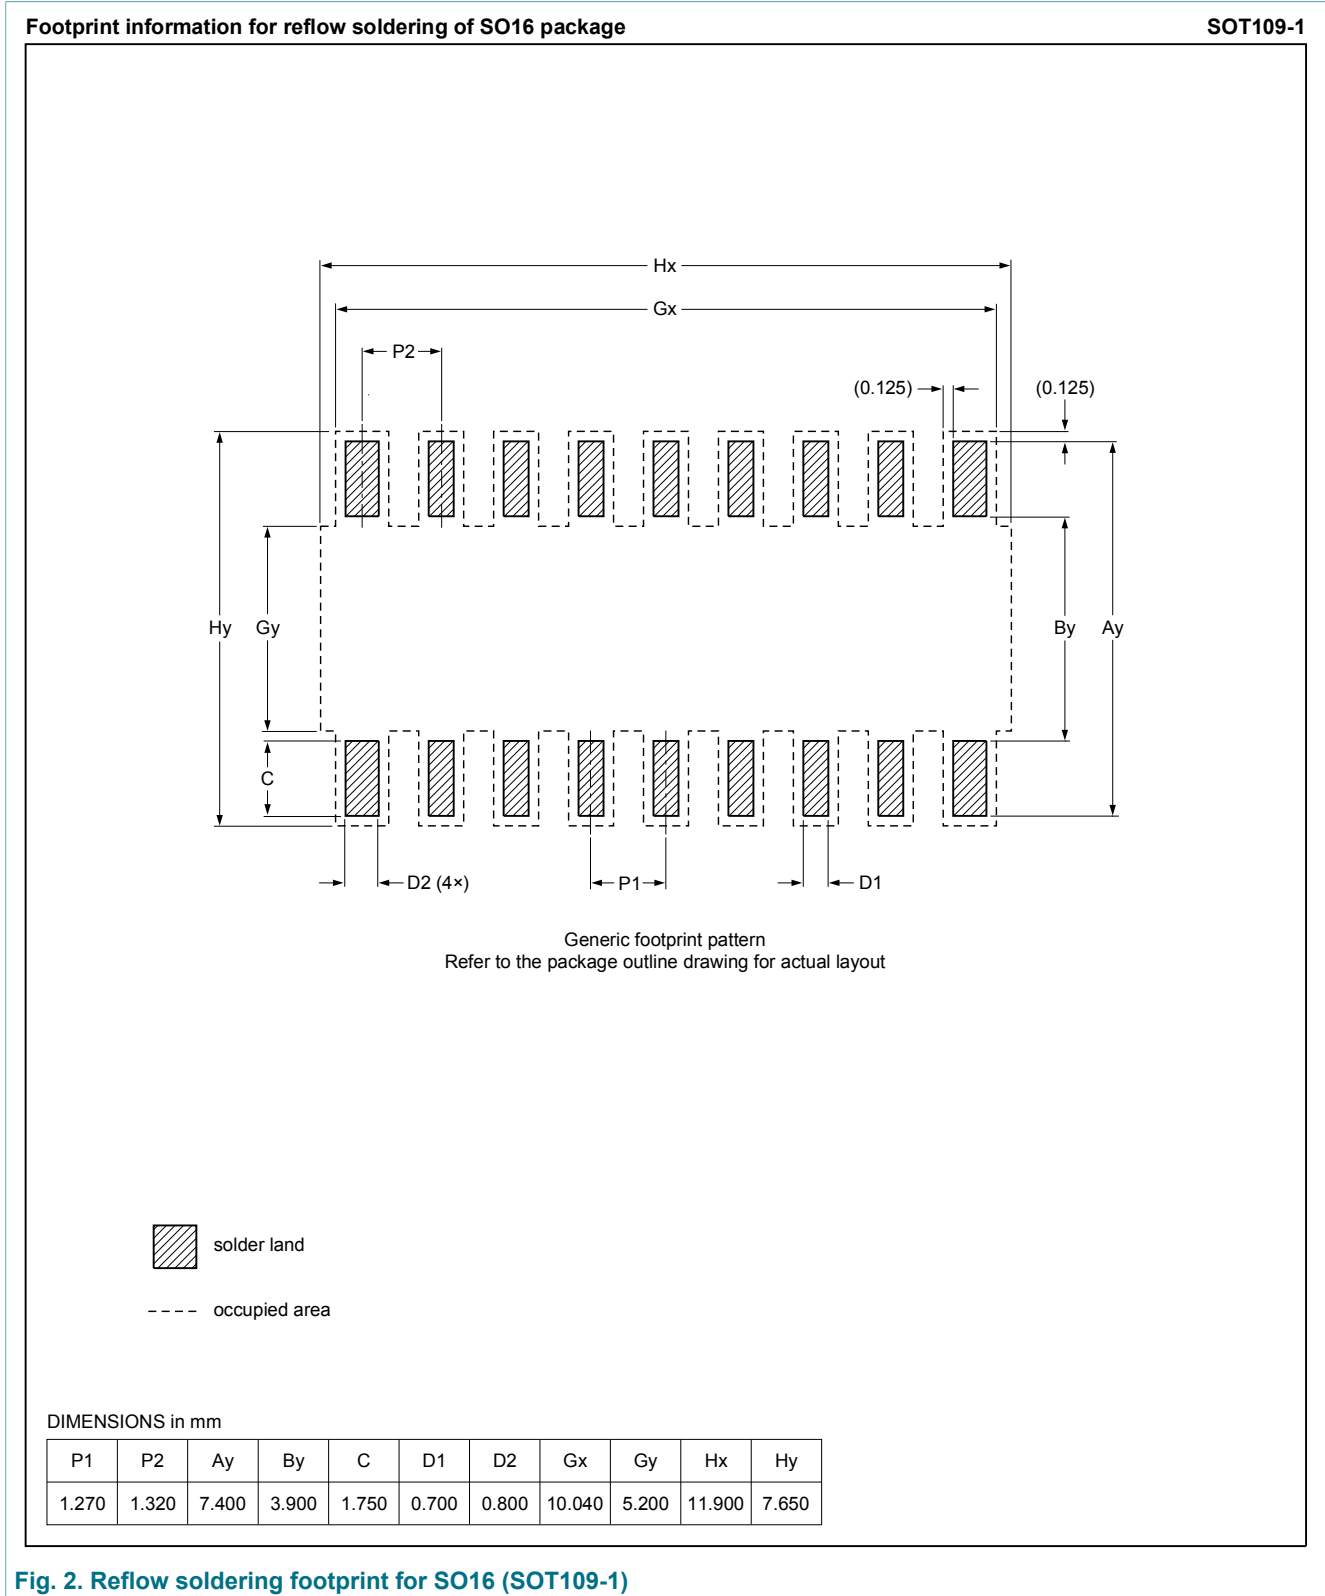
Reflow soldering footprint for SO16 (SOT109-1)
